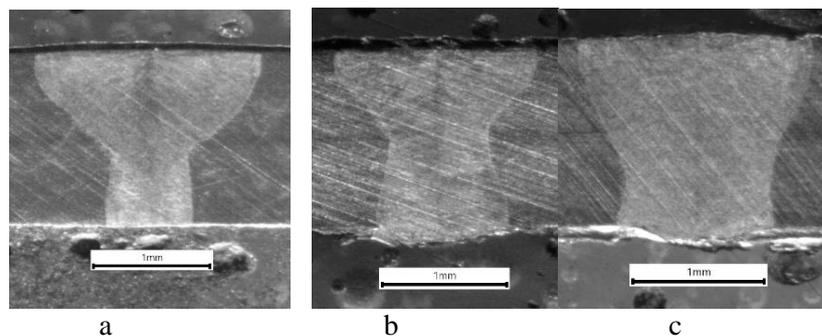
Cross sections of welds made at optimal welding parameters: (a) P=1.5 kW; V=1.5 m/min;  $\Delta F=0$  mm; (b) P=2.5 kW; V=2.5 m/min;  $\Delta F=0$  mm; (c) P=3.5 kW; V=3.5 m/min;  $\Delta F=0$  mm
